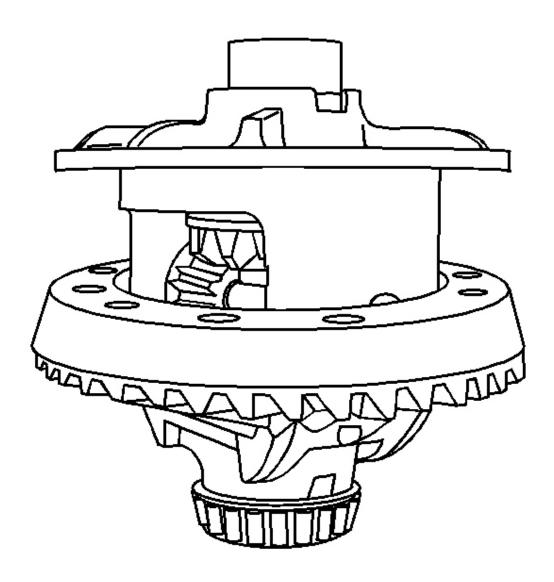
Ring Gear & Differential Case Courtesy of GENERAL MOTORS CORP.
